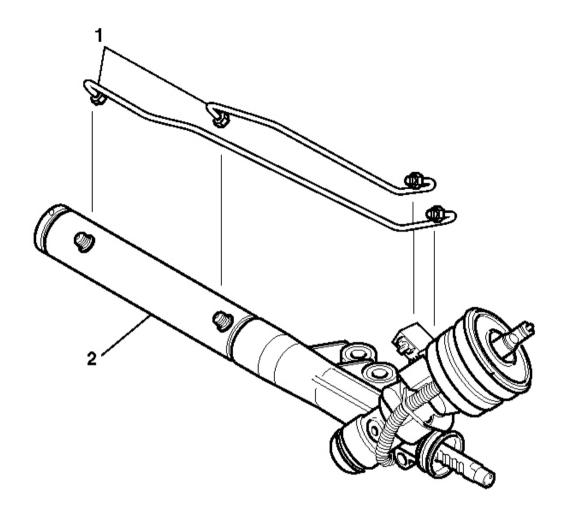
Cylinder Line Assemblies, Rack & Pinion Gear Assembly Courtesy of GENERAL MOTORS CORP.
